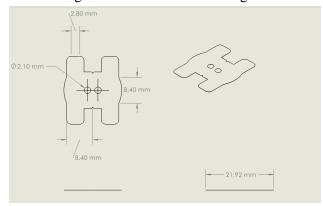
SolidWorks Drawing of flattened butterfly matrix band design with dimensions
